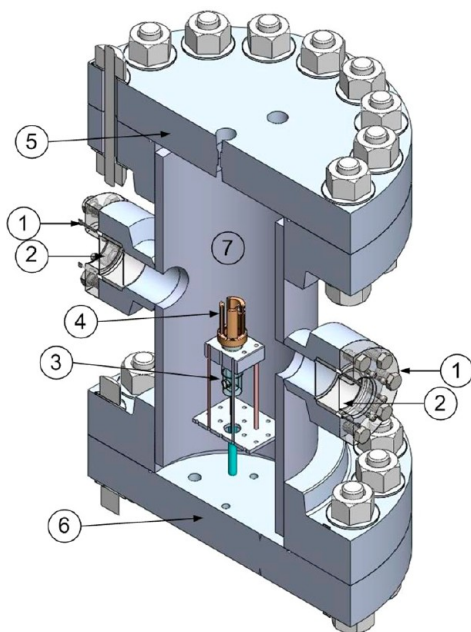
Cutaway view of the high-pressure chamber: 1, optical access ports; 2, quartz windows; 3, burner assembly; 4, chimney assembly; 5, upper flange housing the exhaust, safety valves, and pressure transducer; 6, lower flange housing air, fuel pipes, and wiring; and 7, combustion chamber.
